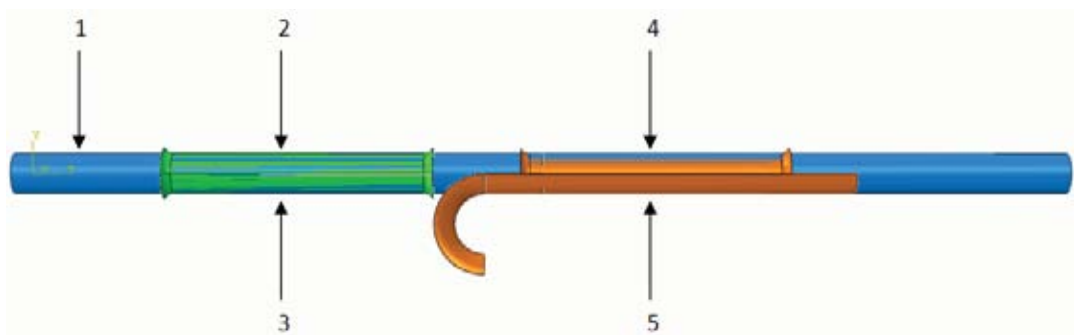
Geometry of numerical model; 1- pipe, 2- upper holder of the feeding head, 3 - lower holder of the feeding head, 4 - upper holder of the bending head, 5 - lower holder of the bending head integrated with rotational die
